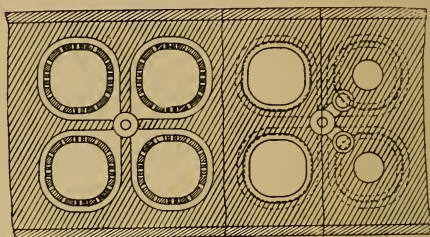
SECTIONAL PLAN OF JAHNS PRODUCER
